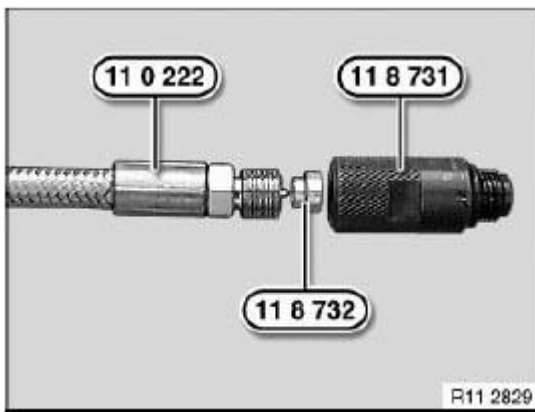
Identifying Special Tool 11 0 222, 11 8 732 And 11 8 731
